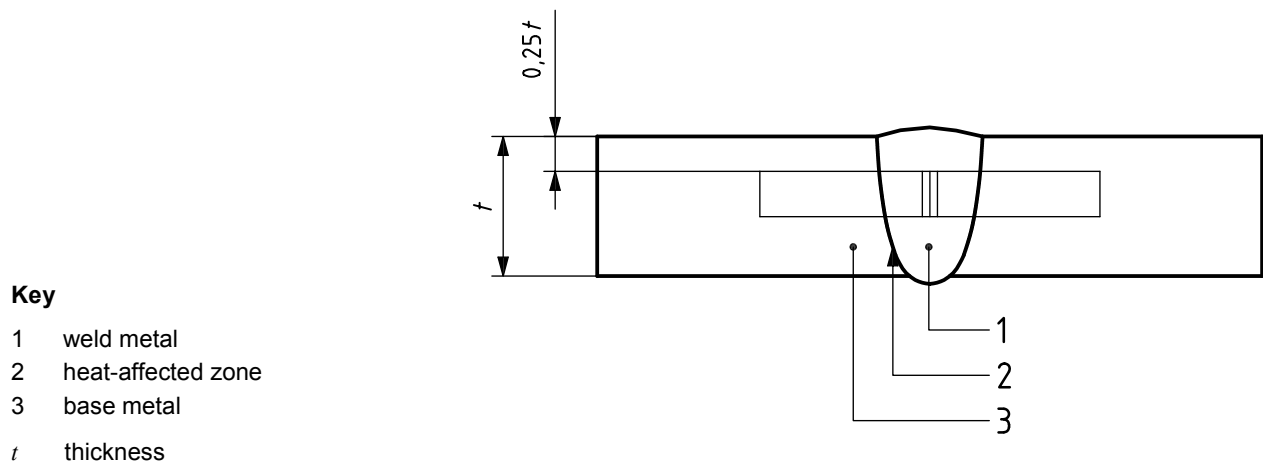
Charpy V-notch weld metal (WM) specimen location
